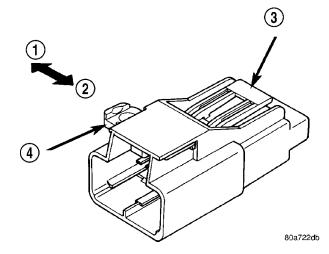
SIDE AIRBAG IMPACT CONTROL MODULE CONNECTOR
